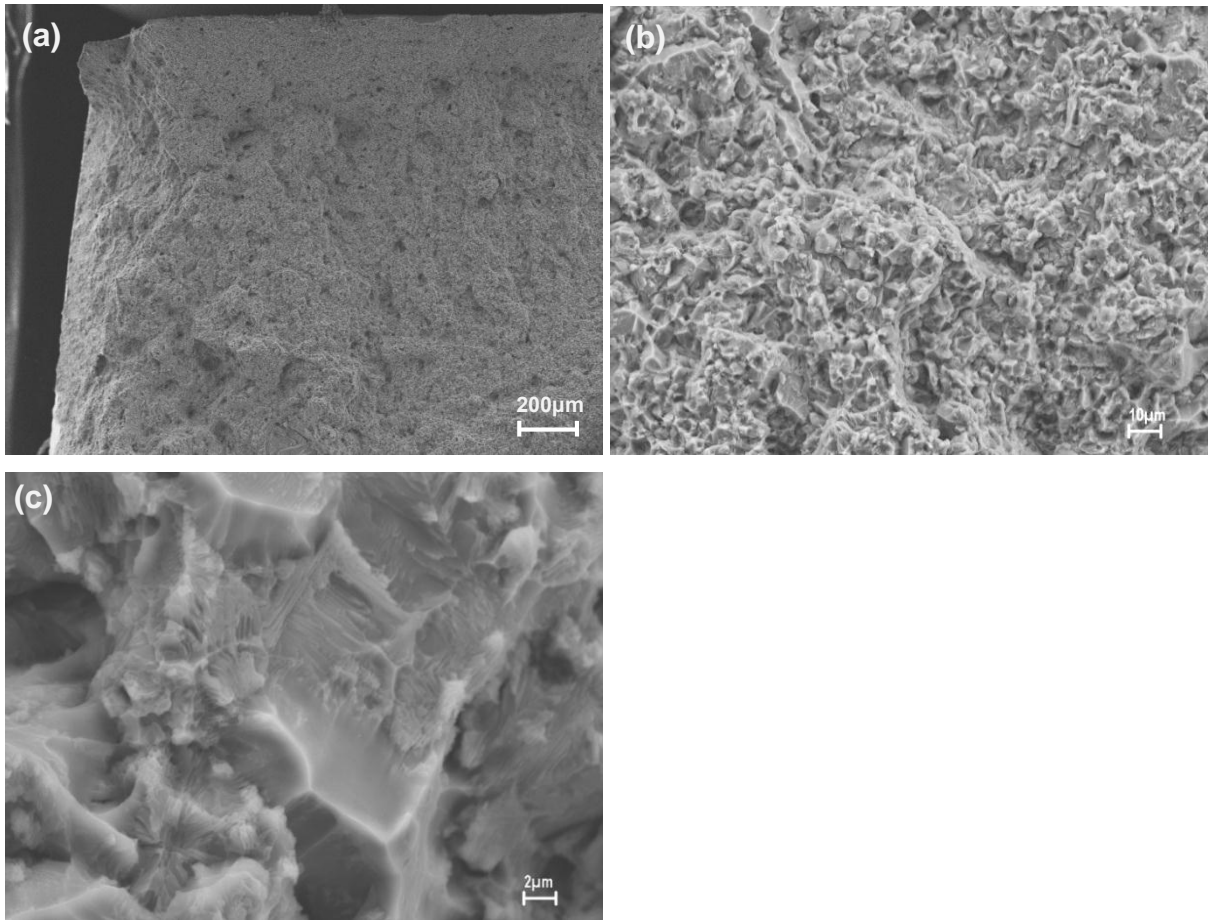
Typical fractographs on a cross section of 5×6.35 mm flat die-cast tensile sample (a) overall fractural image, (b) fracture surface at high magnification, and (c) detailed fracture.
